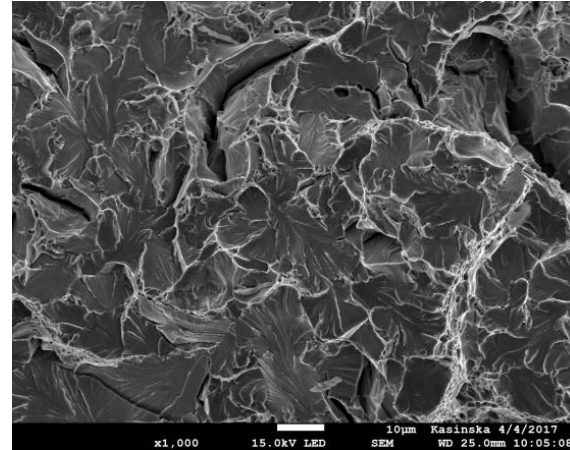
Cleavage fracture next to the circumferential notch in specimen C04; material NW, temp. -50°C
